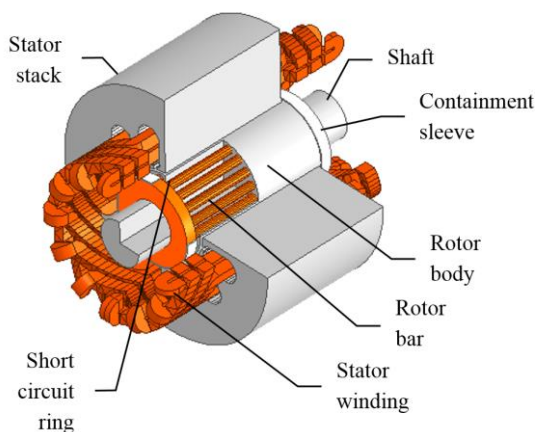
Solid rotor cage induction machine 6 kW, 120 000 rpm
